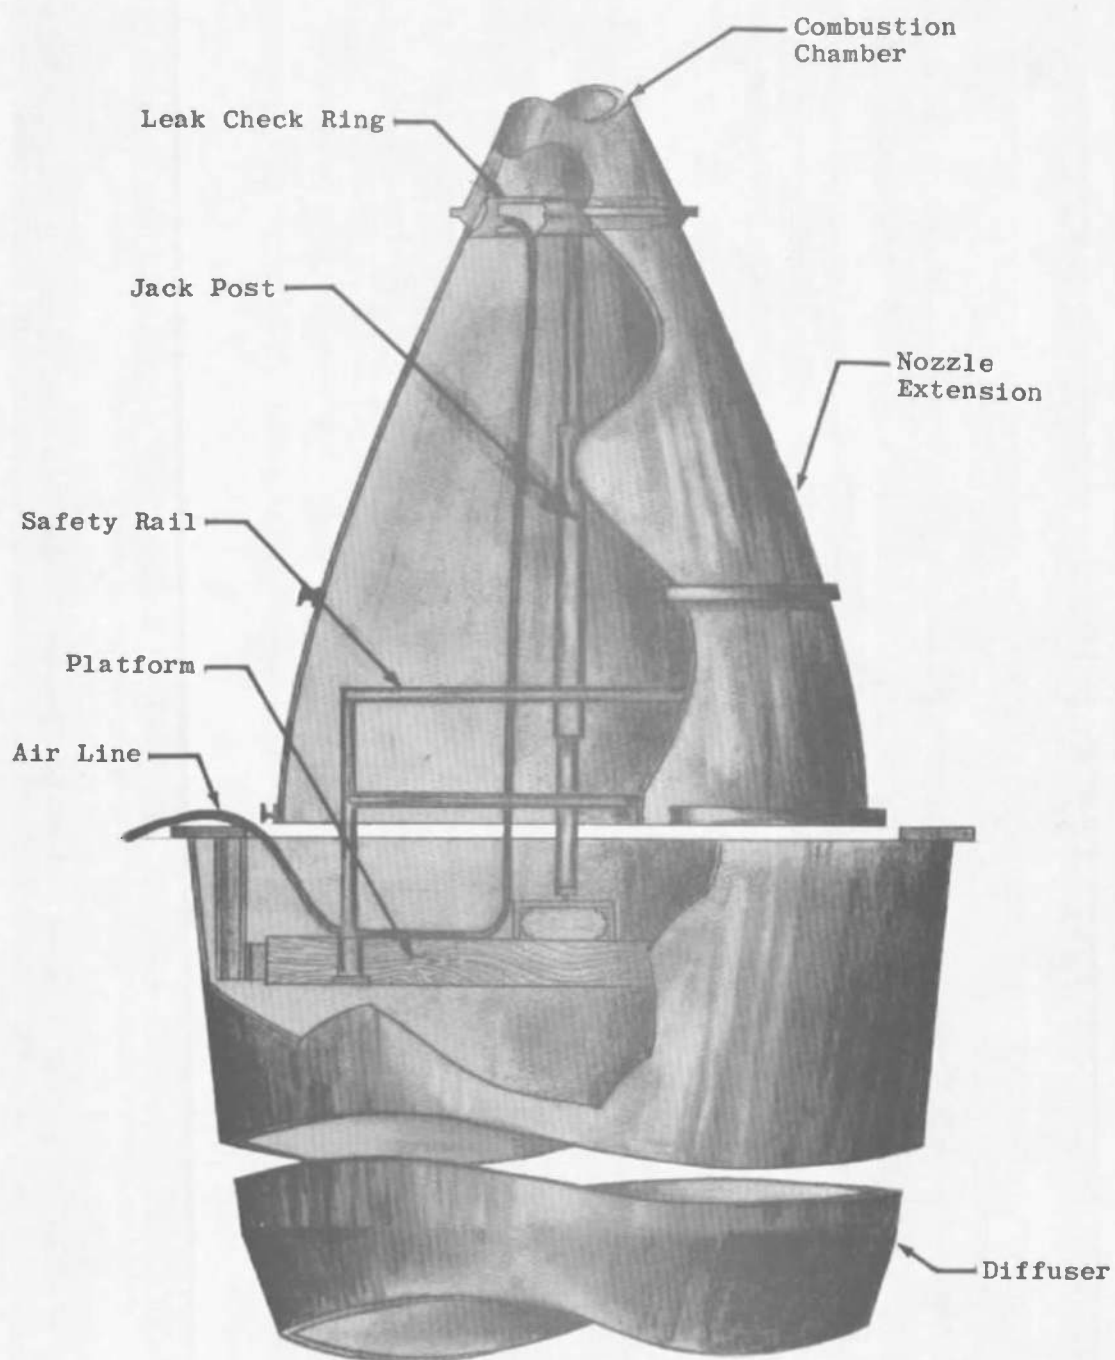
Artist's Sketch of Leak Check Fixture Installed in Test Cell
